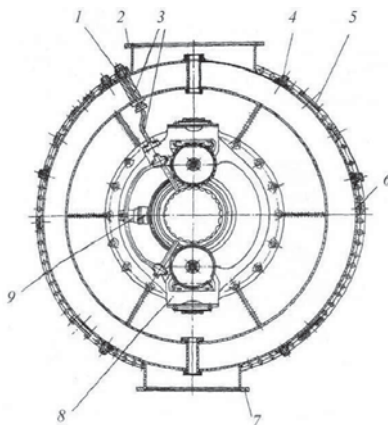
Adapter between compressors of the D050 engine [15]:
